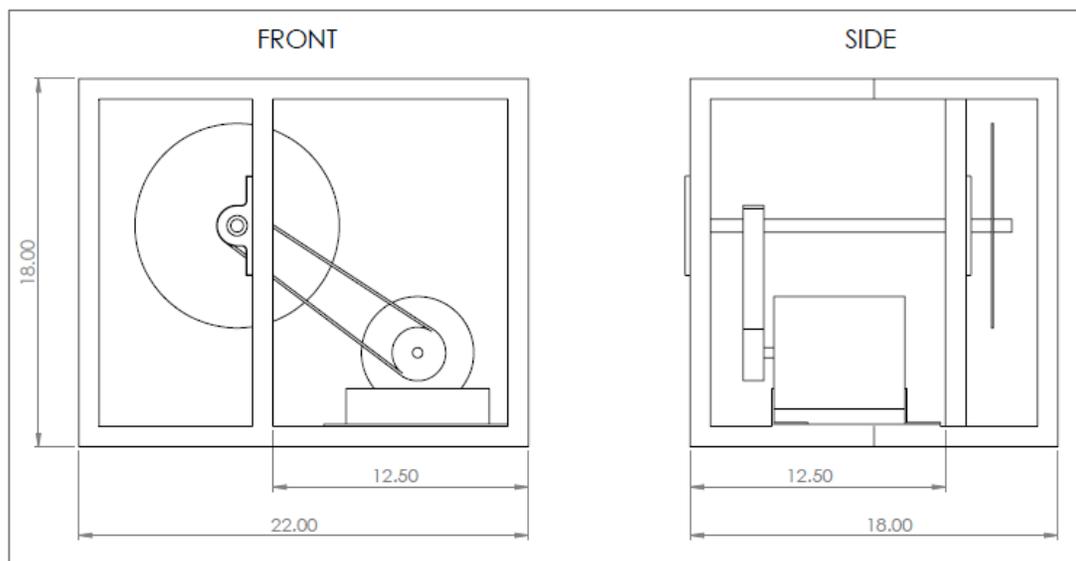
The SOLIDWORKS model of the test bed design including some overall dimensioning.
